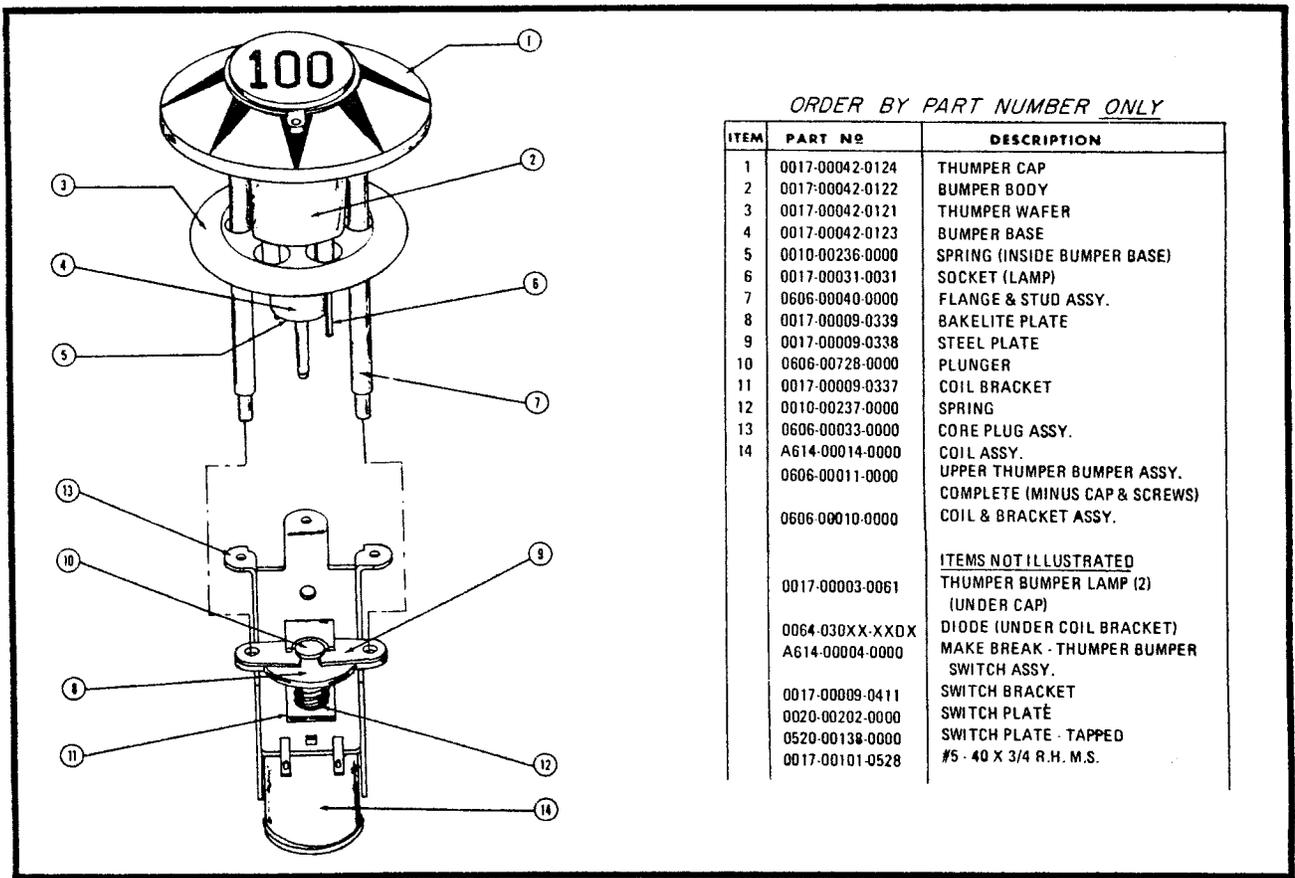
Exploded view and parts list of the thumper bumper and coil assembly.
